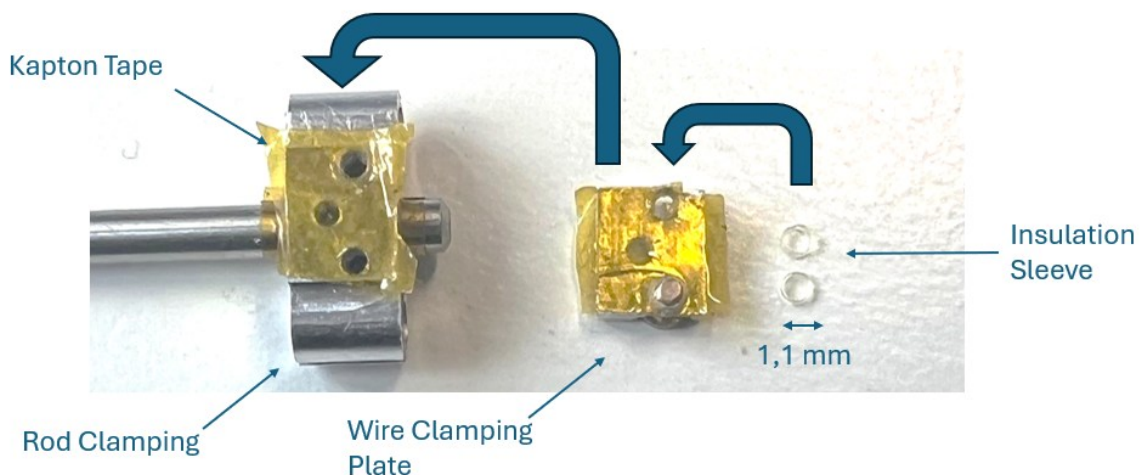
Electrical insulation concept for the SMA-clamp. Insulation measures included Kapton tape wrapping and a microfabricated insulation sleeve to prevent electrical short circuits between SMA wires, aluminum connectors, and clamping components.
